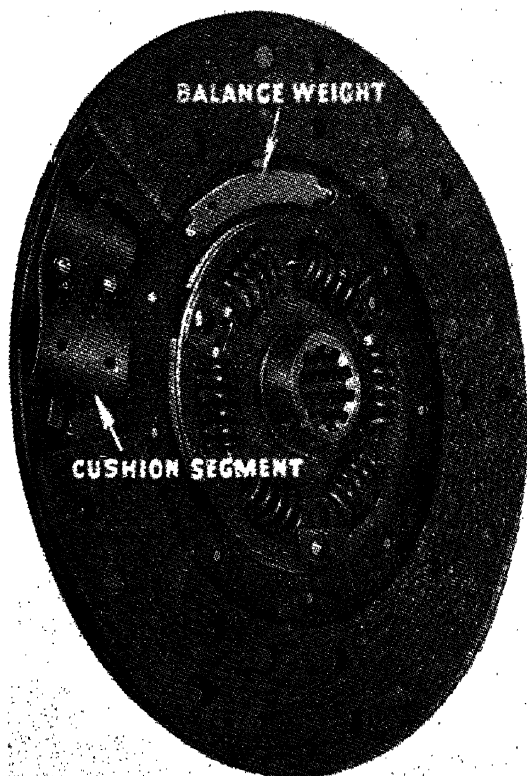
Borg and Beck Flexible Clutch Plate.
